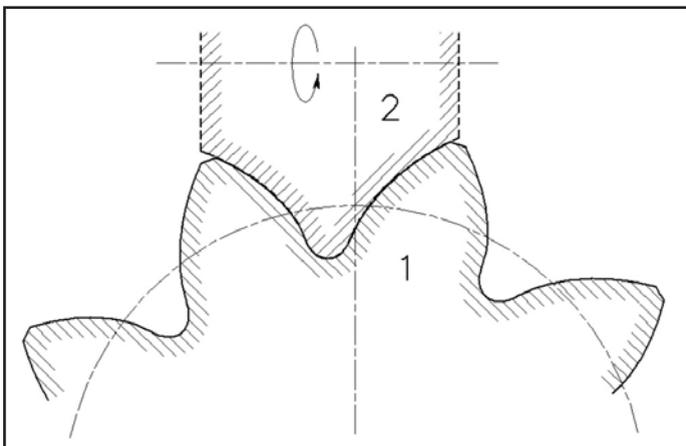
Gear form machining: 1) gear profile; 2) tool profile.
